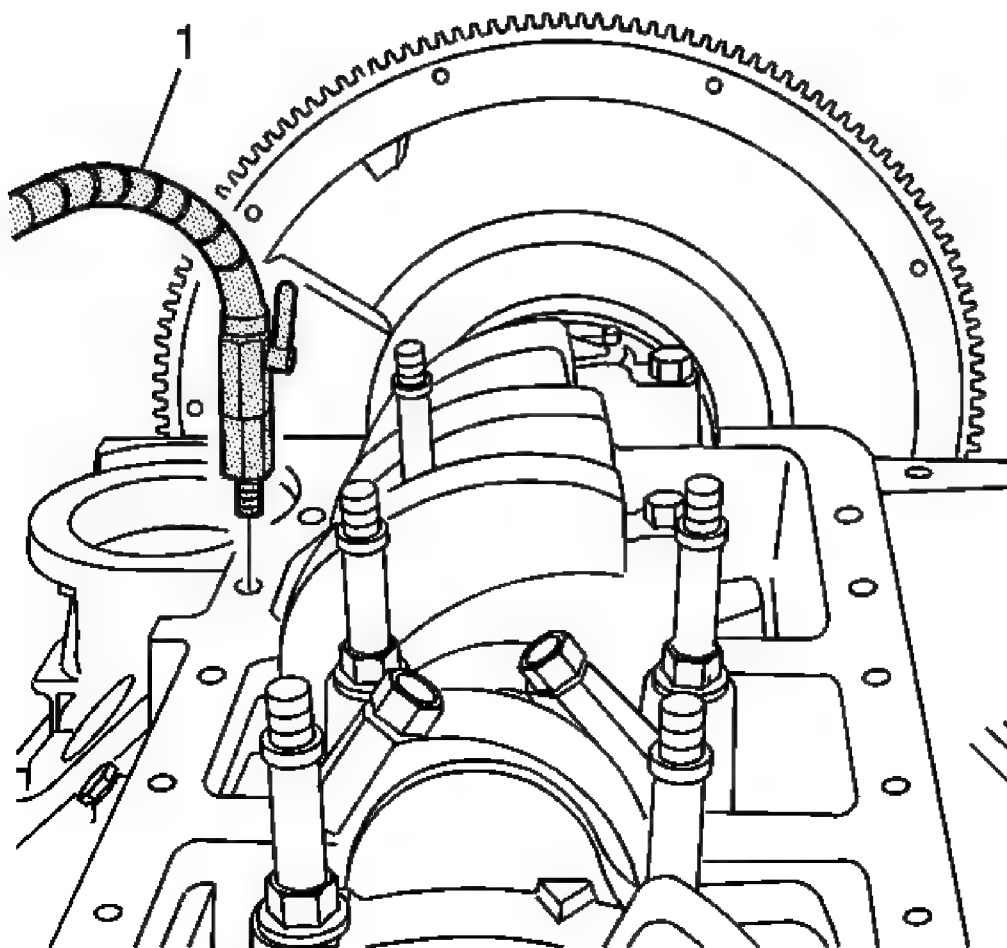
Installing Swivel Base To Oil Pan Rail Of Engine Block
